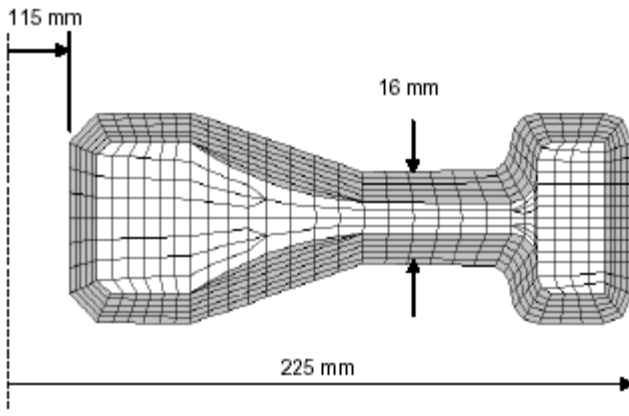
Finite element model of forging geometry with gray elements indicating material to be removed, and white elements signifying the final disk geometry.
